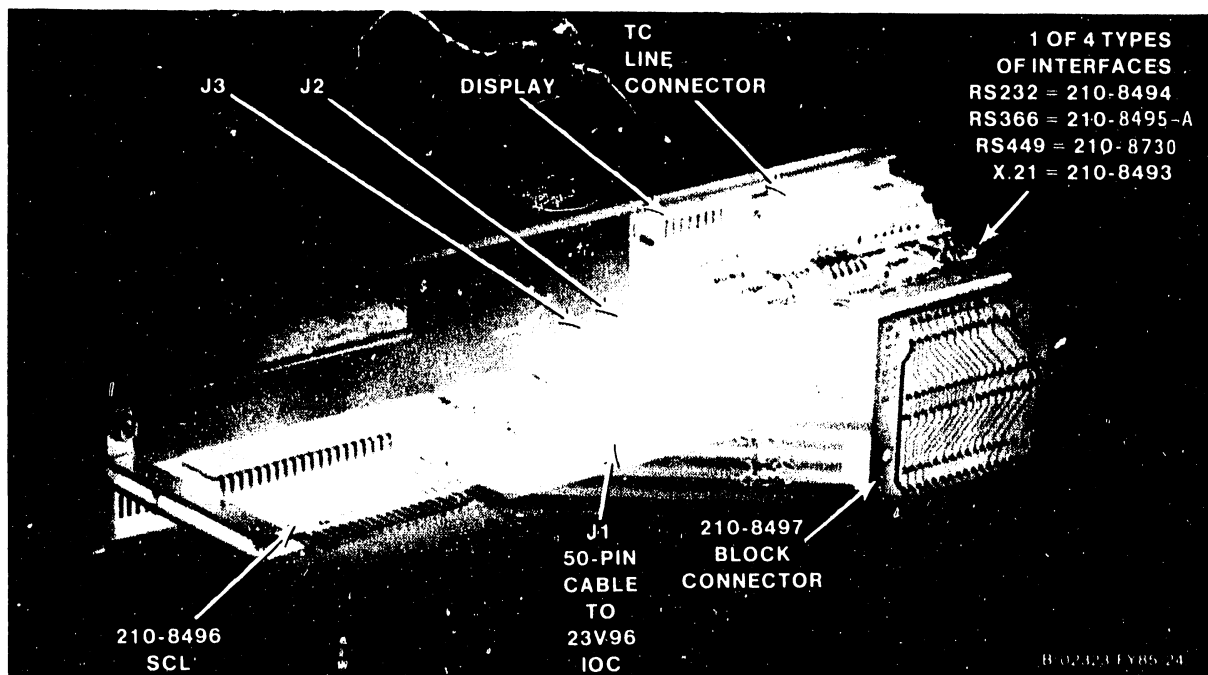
270-1003 Multiline TC Back Panel Assembly
